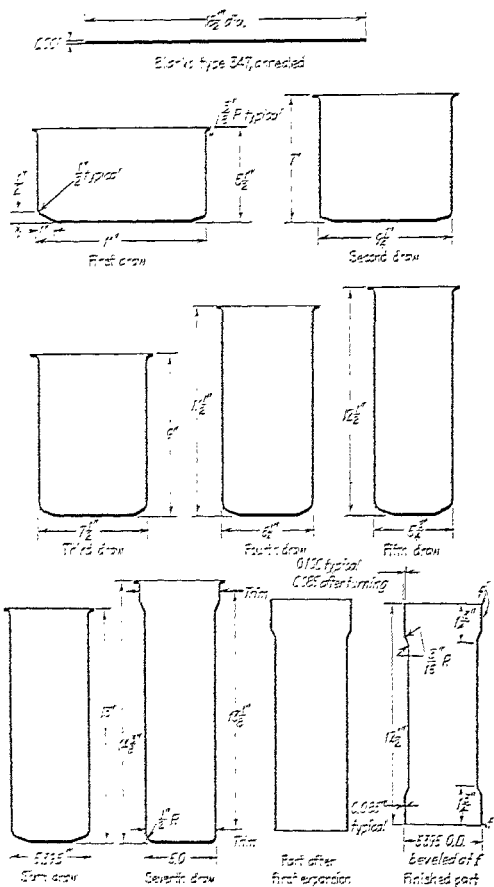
Draw reductions for a deep stainless-steel shell.
